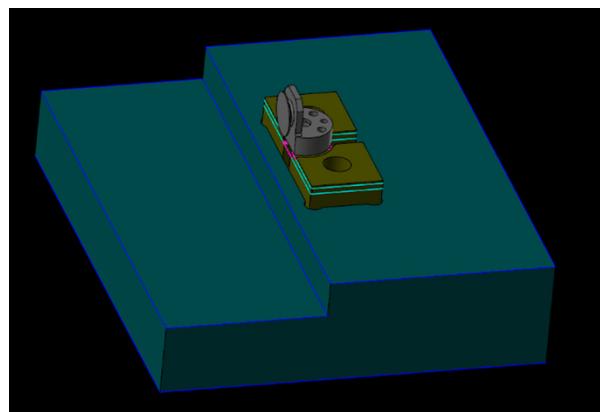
A model of the fixture that held the part for keyseat machining. The hard jaws (small squares) held the part (shown between the jaws) in place.
